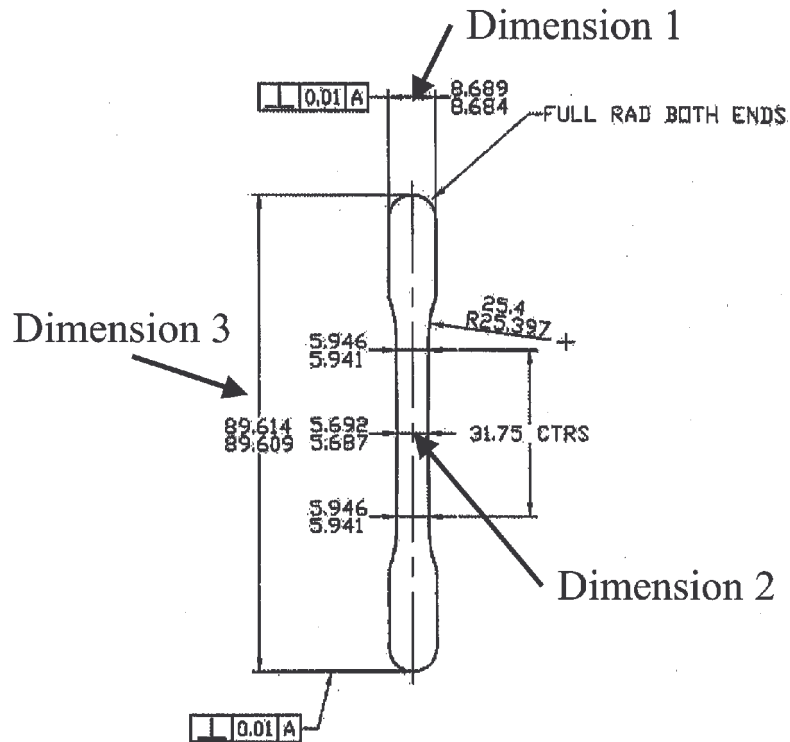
Selected dimensions for shrinkage measurement on the sintered tensile test bar.
